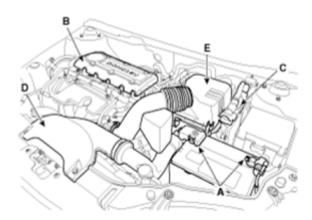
Identifying Battery Terminals, Engine Cover, ECM Connector, Air Duct, & Air Cleaner Assembly
